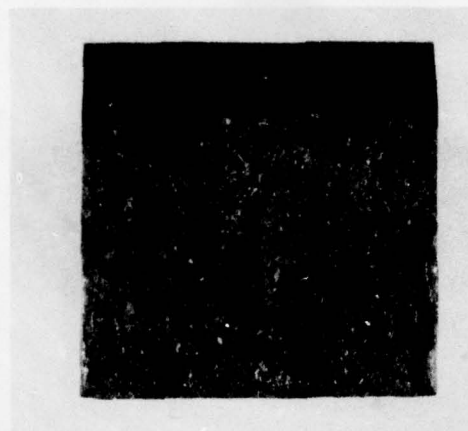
HY-130 weld-metal Charpy specimen D2-1
